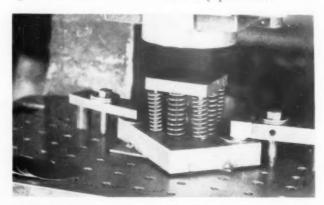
Temporary cupping die; spring-loaded pressure ring. "Nest" machined to receive blank.
